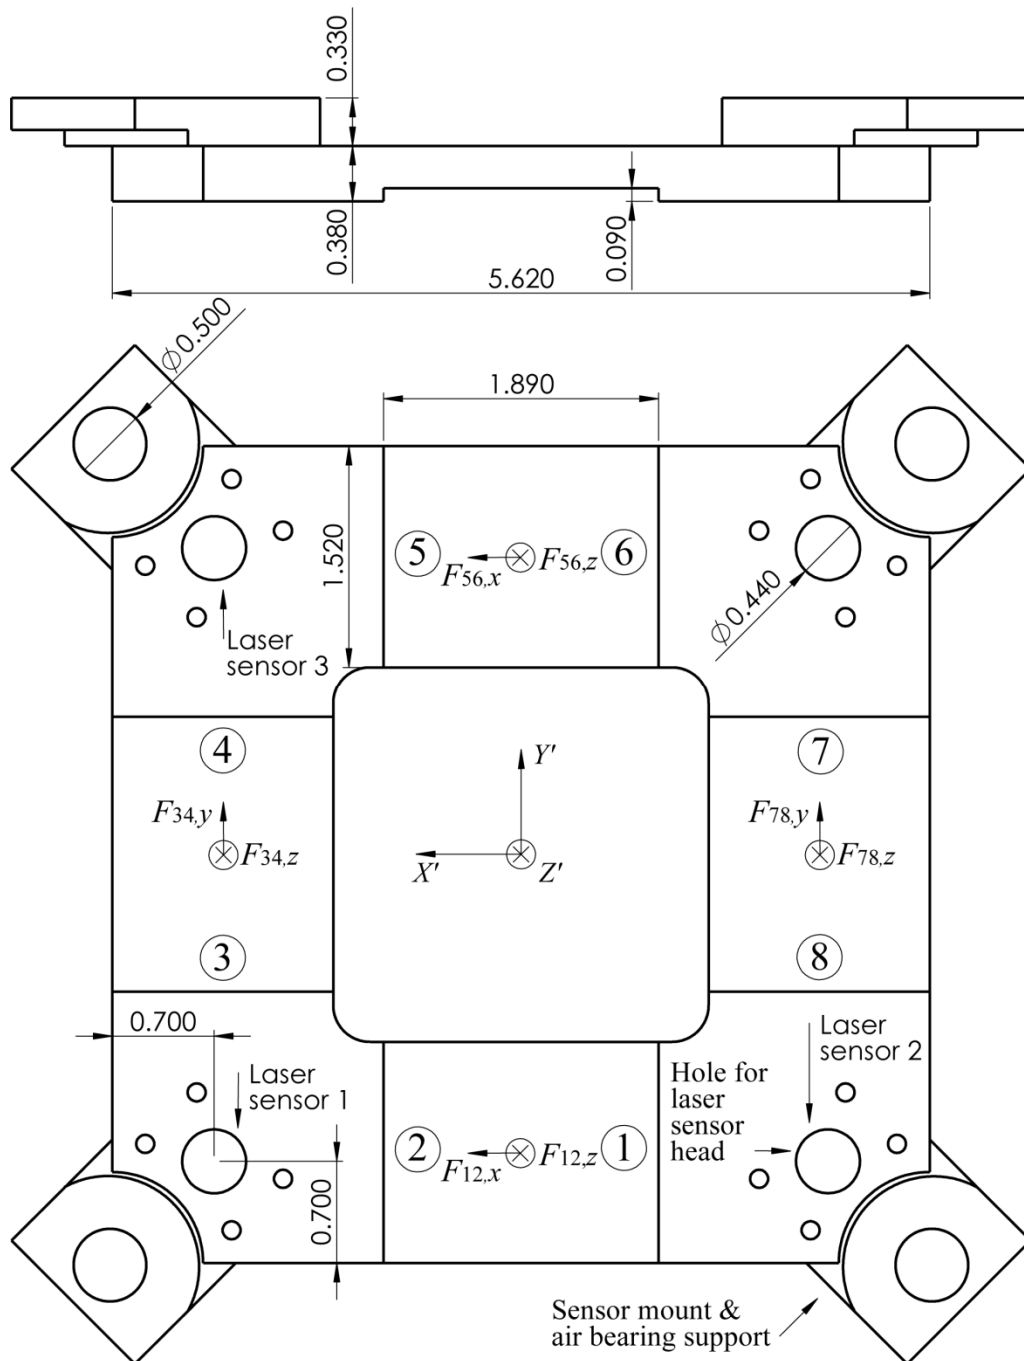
Engineering drawing of the side view and bottom view of the moving platen's frame with the sensor mounts. Unit: Inch.
